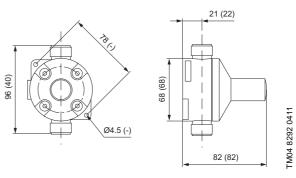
Pressure loading valve. Dimensions in brackets apply to stainless-steel version.
